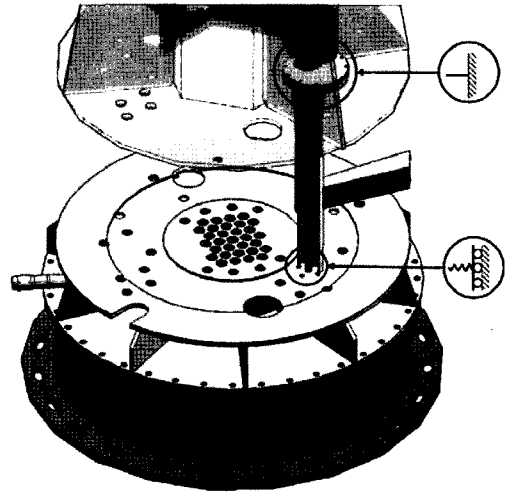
Mounting of the Vacuum Chamber at the Chimney Flange and Grid Plate Hole
